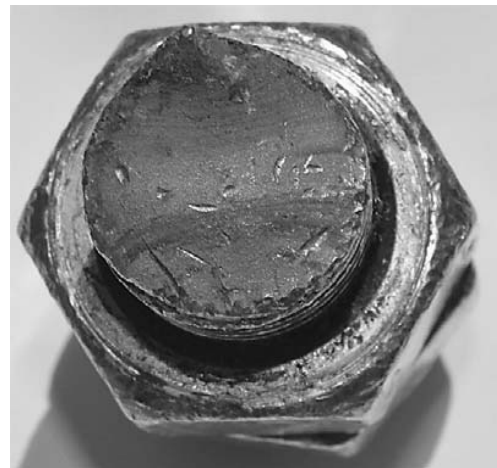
View of the fatigue fracture region of the AP shaft – verification of beach marks
